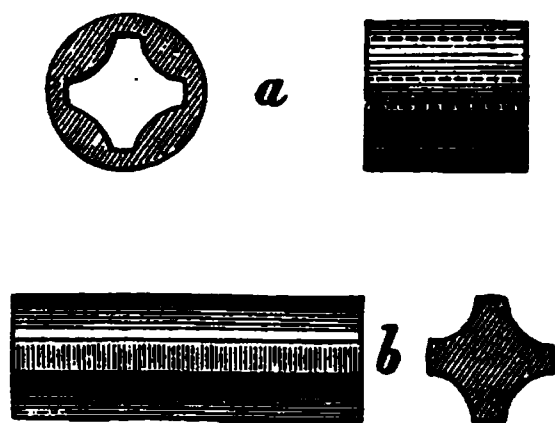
Coupling Box and Breaking Spindle for connecting the Rolls, and the Rolls with the Pinions, &c.
